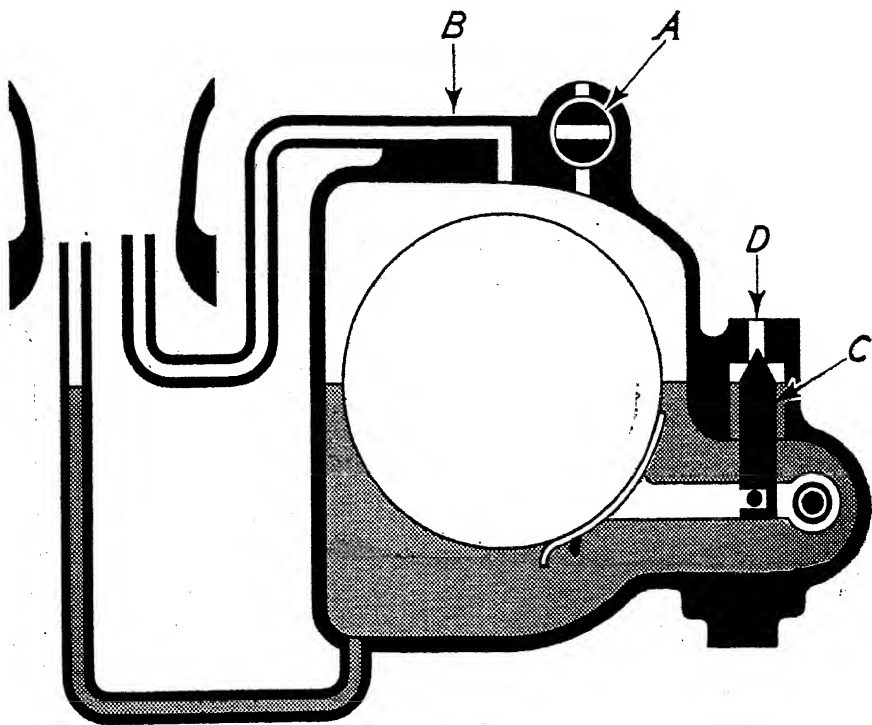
MIXTURE CONTROL VALVE IN PASSAGE TO ATMOSPHERE
